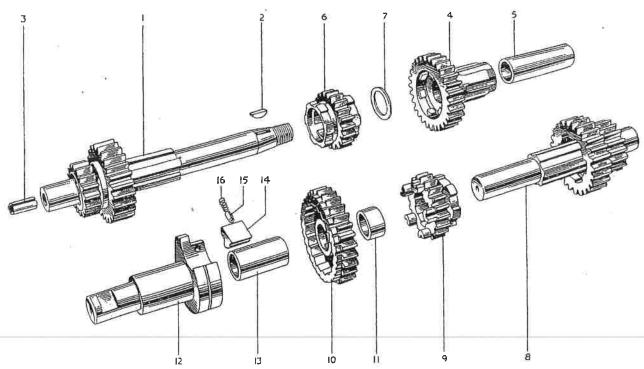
MAINSHAFT AND LAYSHAFT GEARS.
